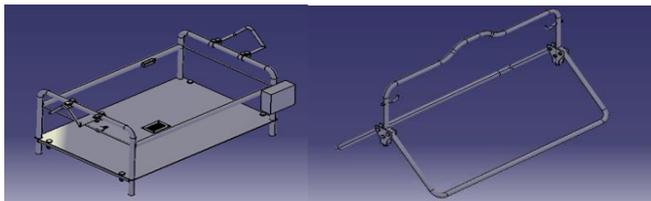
Major parts of the baby cradle Bassinet (top) Cradle Stand (bottom)
